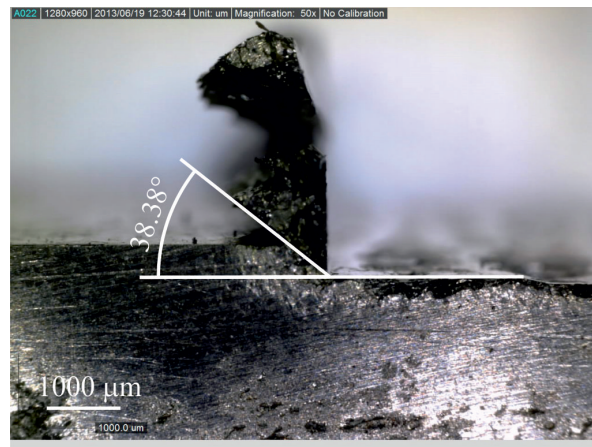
Macro image, showing Ti-2Al cut at 0.01 m.min^{-1} , showing measurement of the shear band angle relative to the cut surface.
